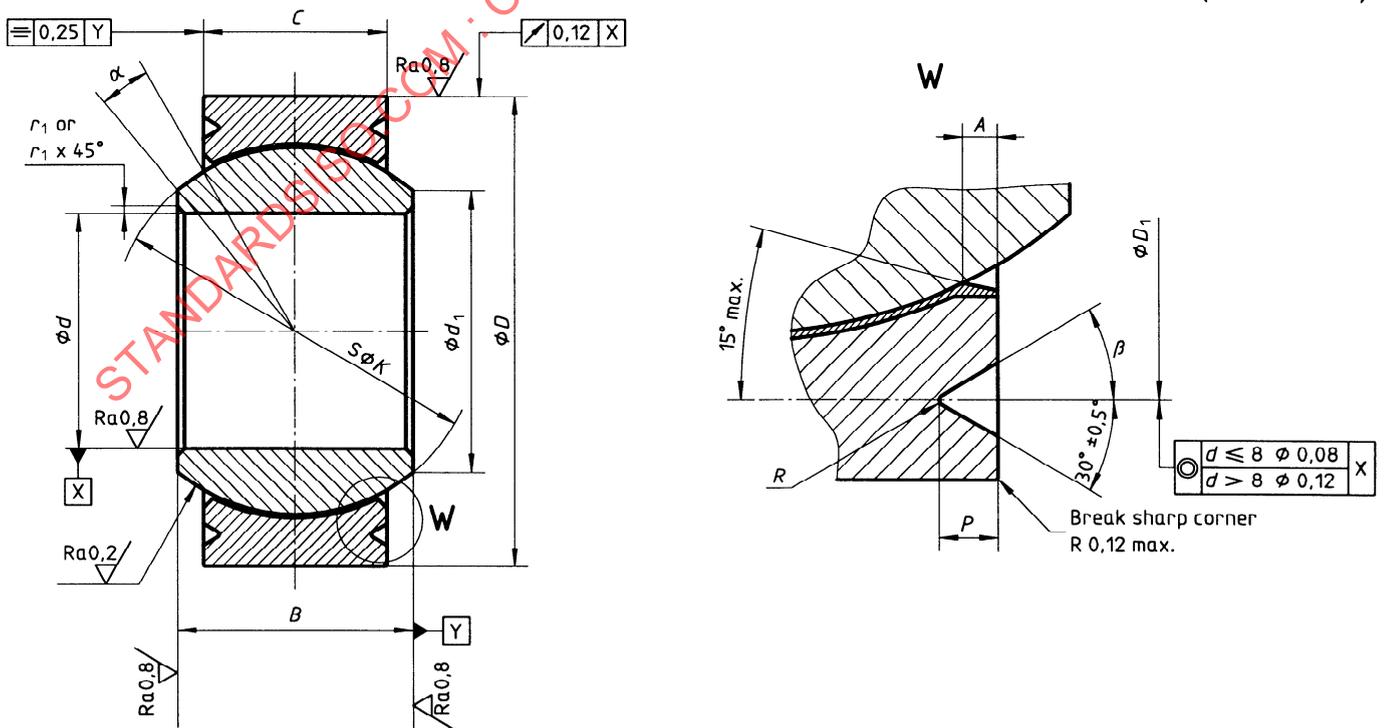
Spherical plain bearing with self-lubricating liner with face groove
